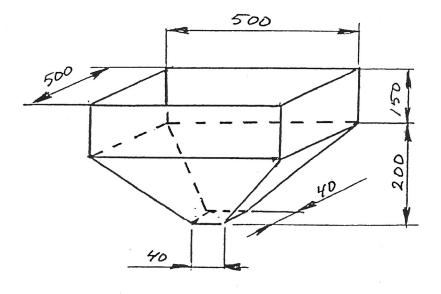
Example of a fertilizer - collecting container (funnel) made in stainless steel plate for fertilizer distributor test
